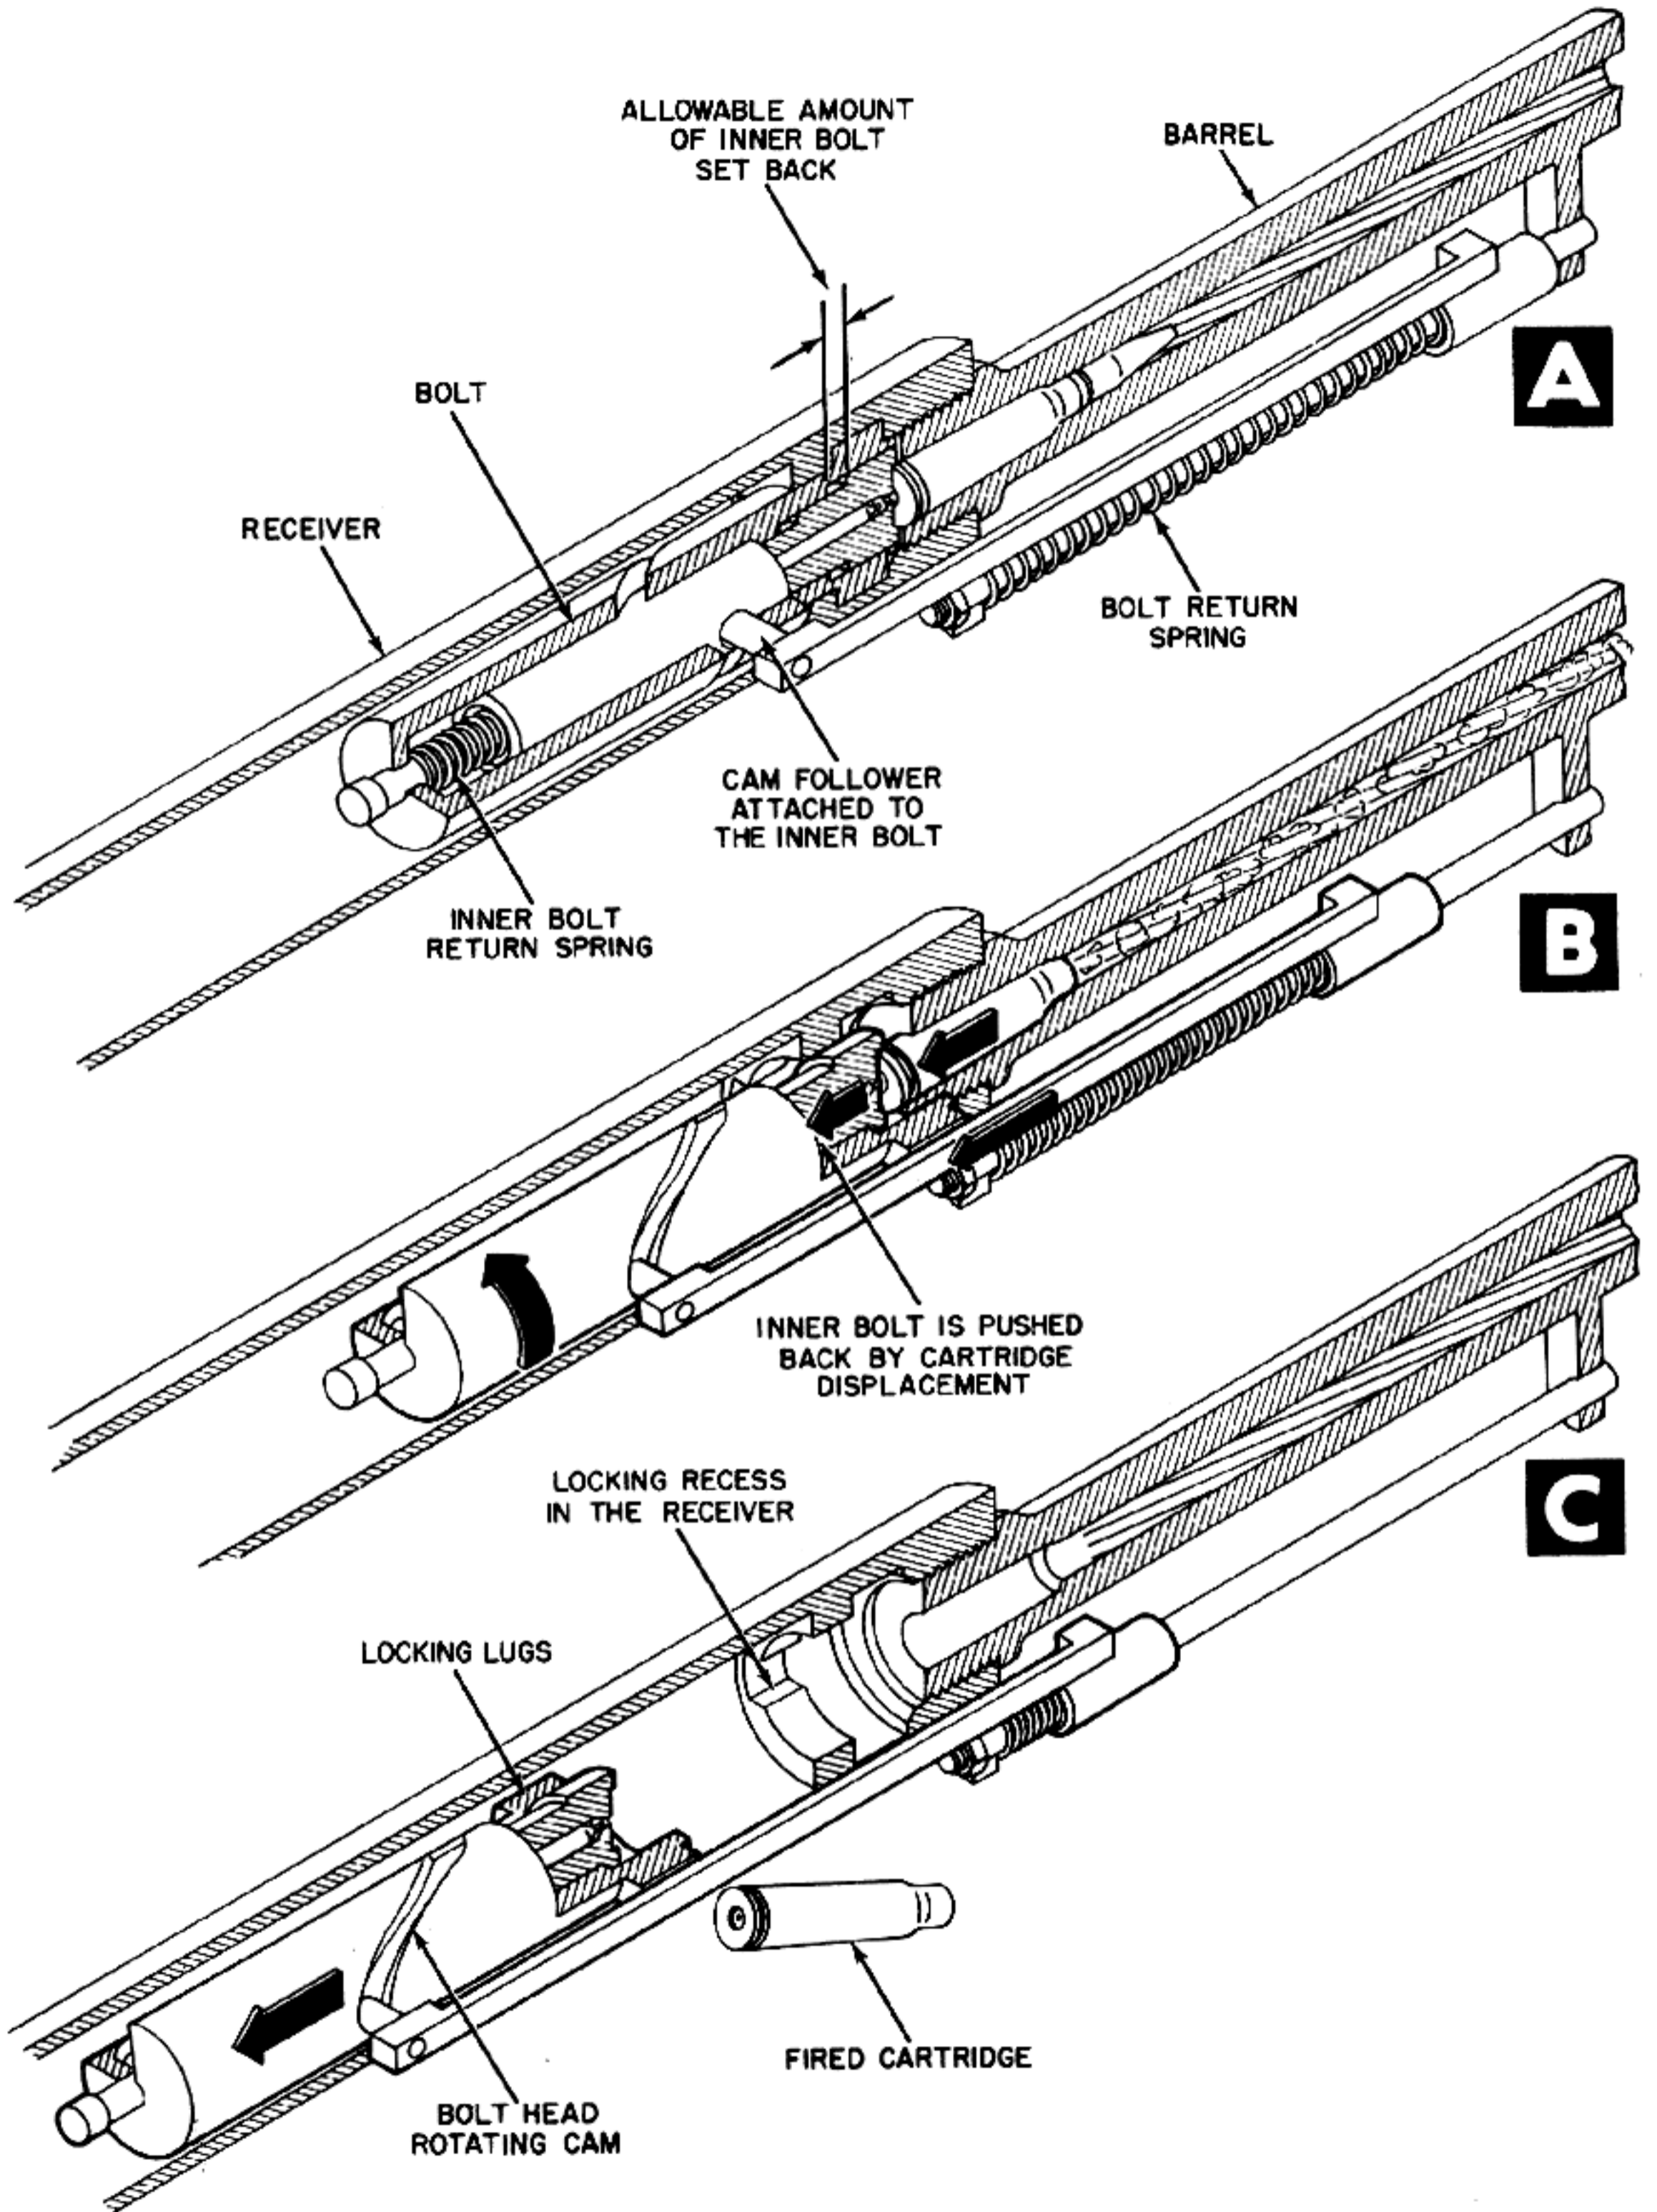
Recoiling Cartridge Case Unlocks Bolt.
